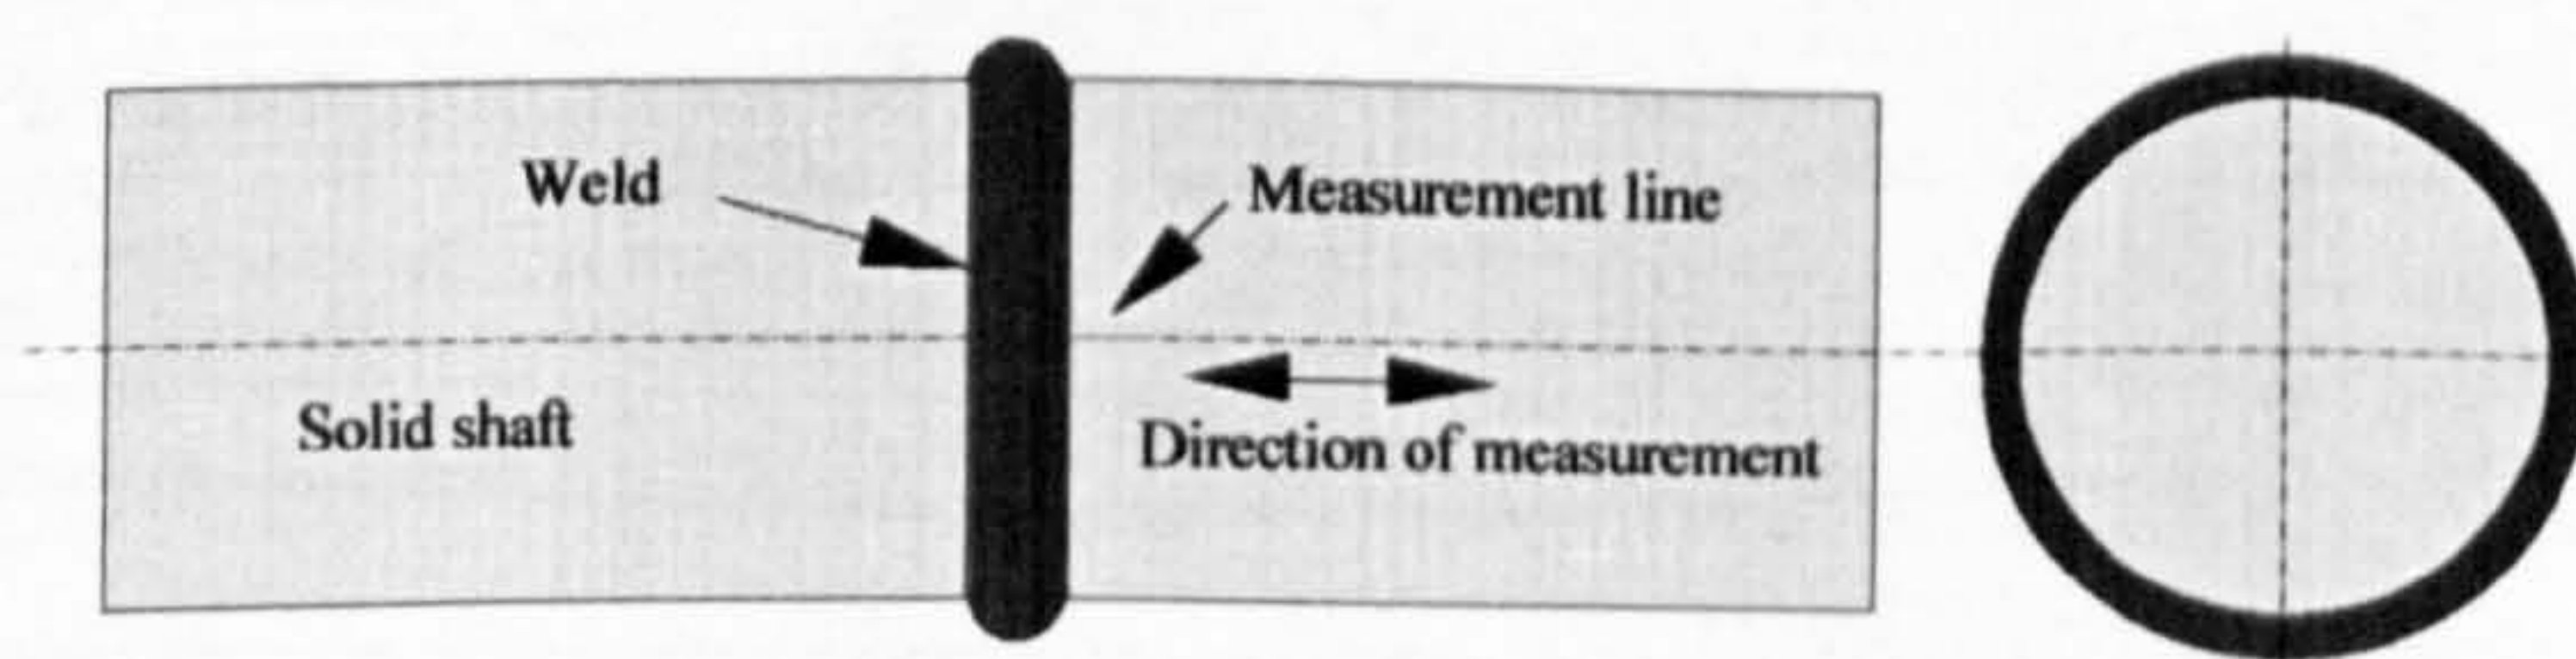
Position of the measurement line in the welded specimen.
